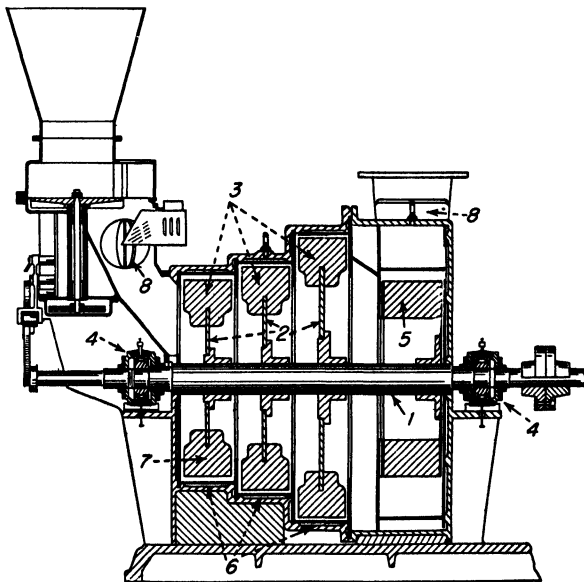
Unitype—impact-type pulverizer. (1) Shaft; (2) hammer disks; (3) pulverizer hammers; (4) self-aligning bearings, dust-tight; (5) exhaustor fan; (6) renewable pulverizer chamber lining; (7) pocket for tramp material; (8) dampers for regulating primary air flow. (Erie City Iron Works.)
